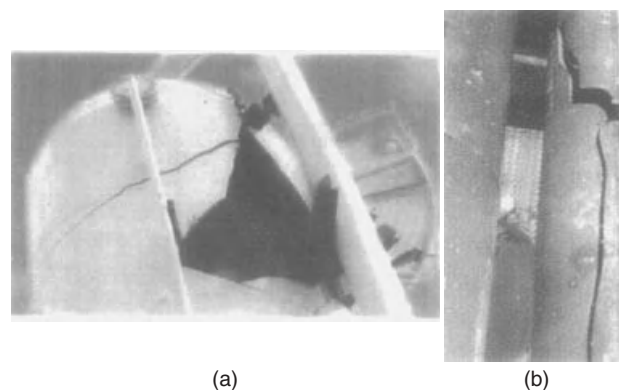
Brittle fracture failure in (a) a vessel and (b) a piping segment.
